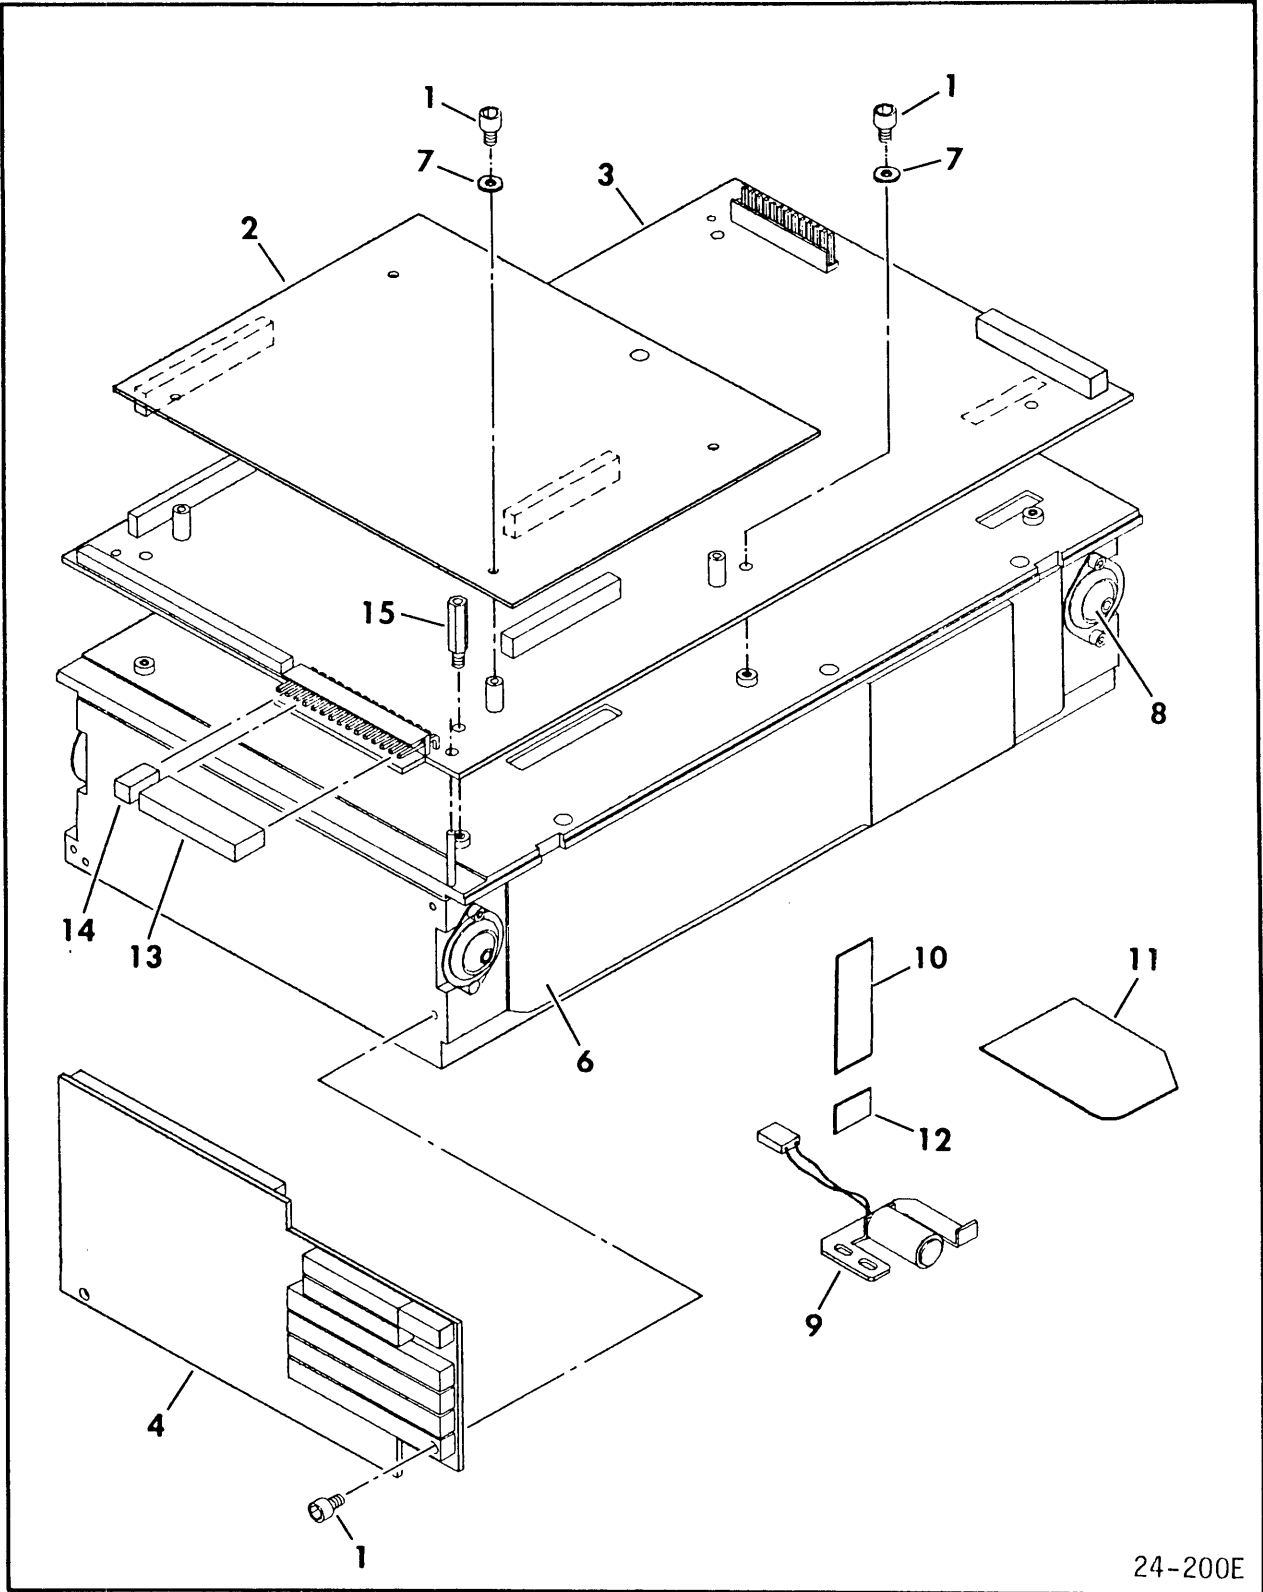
Eight-Inch Module Drive (Sheet 5)
